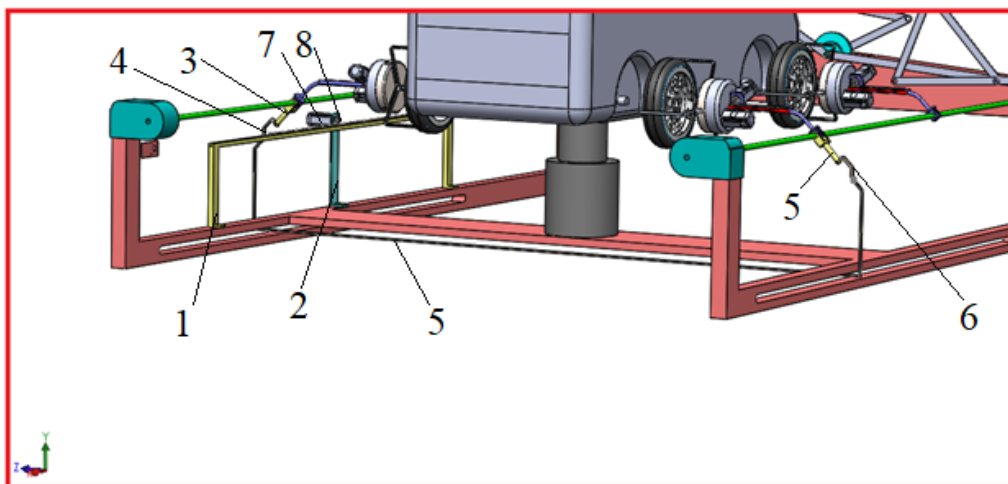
Assembly model indicating the width of the smallest passenger car (width=1234.00 mm) being accommodated by the width adjustment module.
